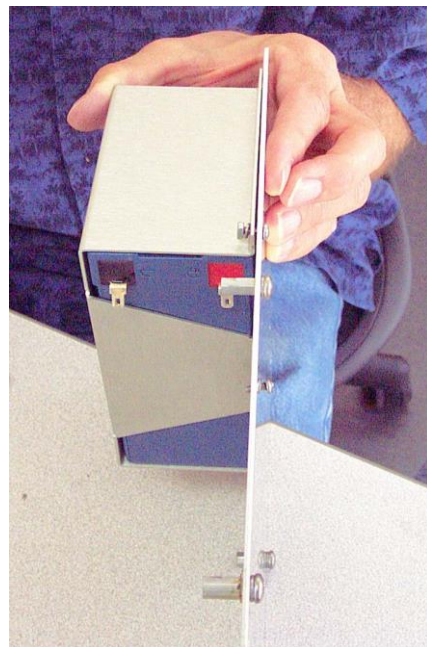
, Tighten all six nuts with Phillips screwdriver and 5/16" wrench
